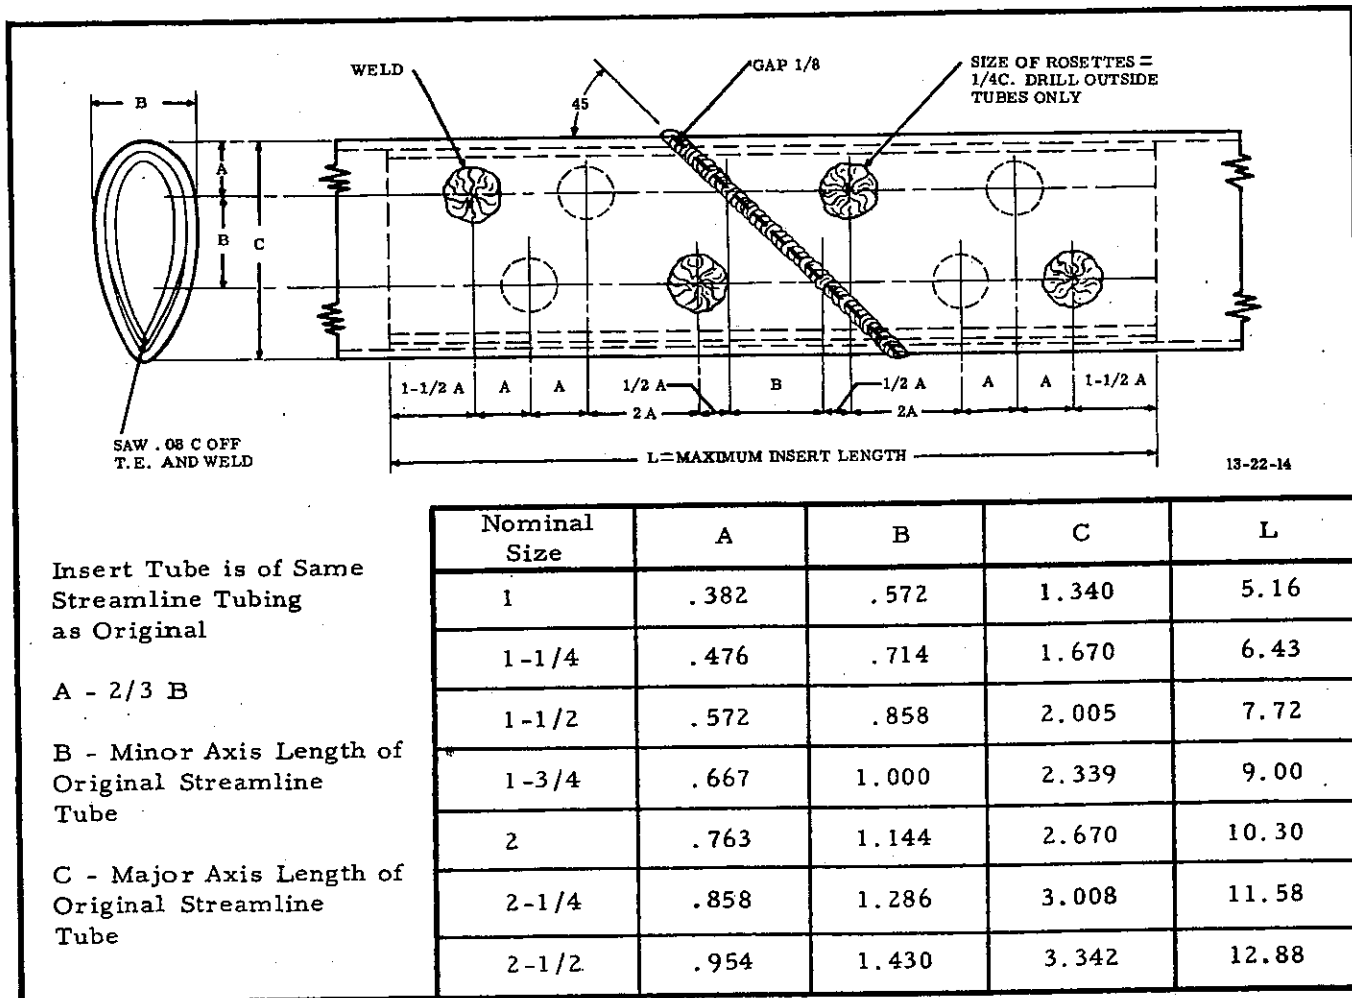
Landing Gear Streamlined Tube Splice using Split Insert
